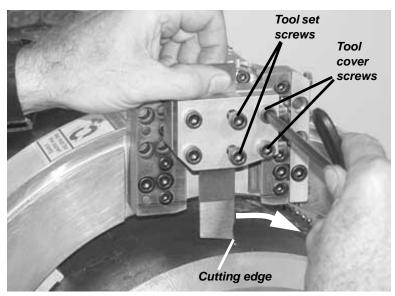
Installing the parting tool with the cutting edge in the cutting direction as shown.
